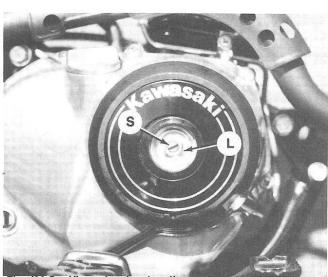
View showing location of clutch adjusting screw (S). Refer to text for adjustment.
